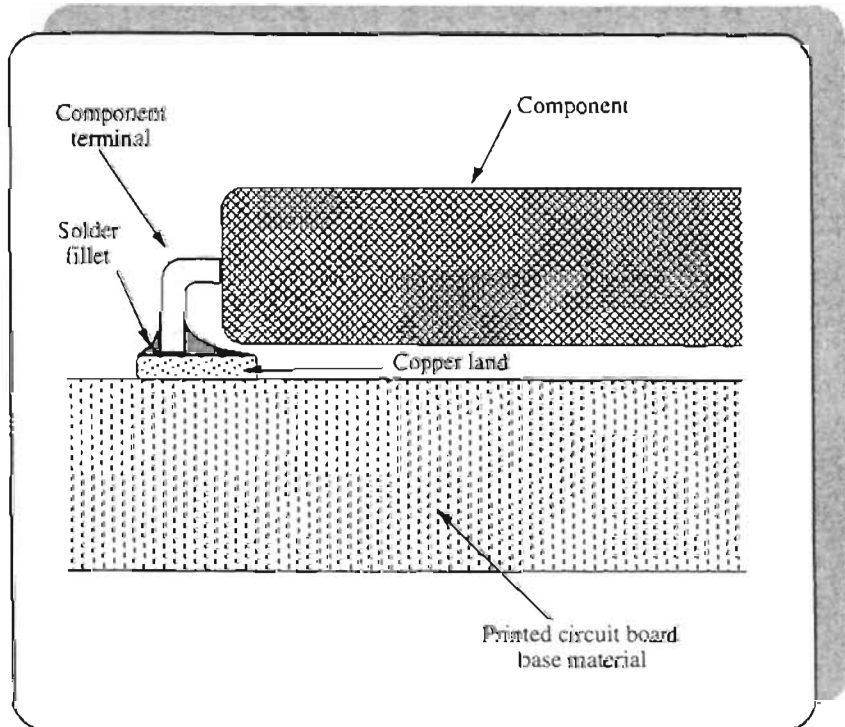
Compliant butt joint, formed when soldering a cropped leaded component to a surface mounted assembly
